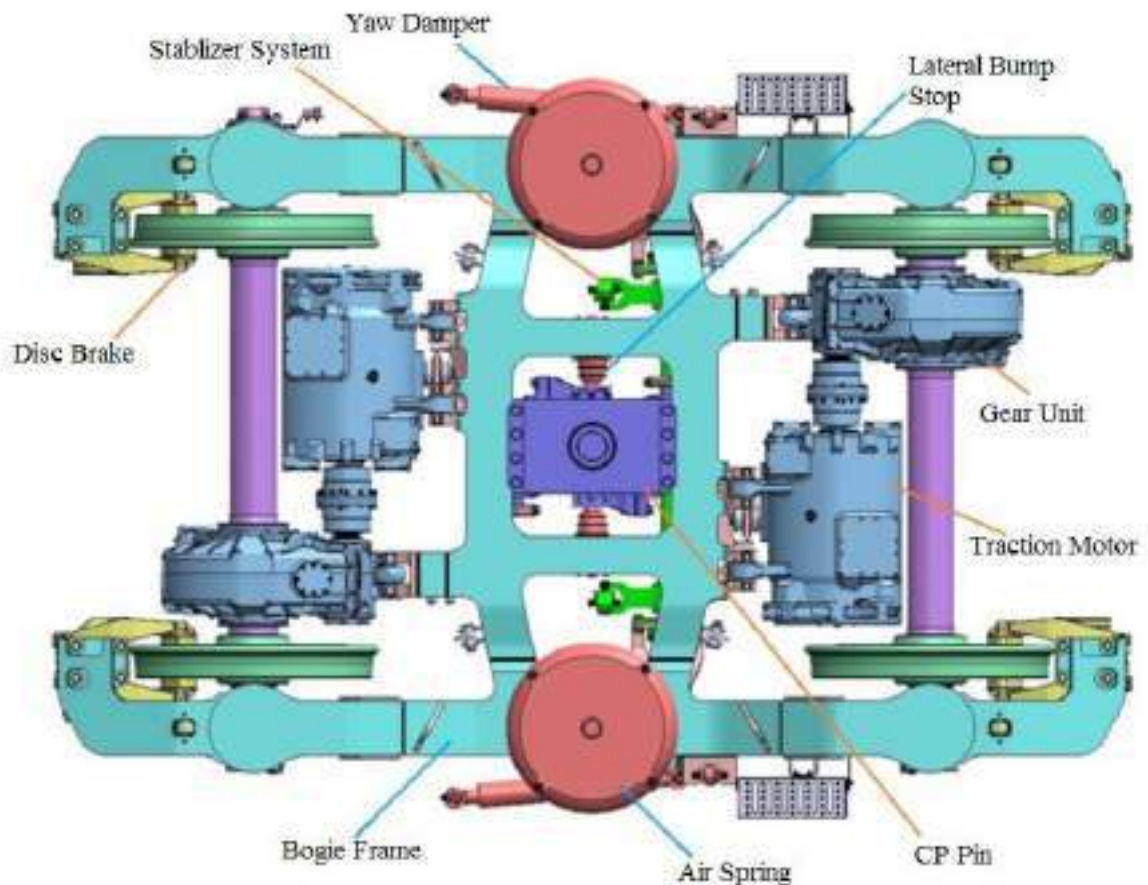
Train Set Bogie with Traction Motor and Gear Box Assembly
